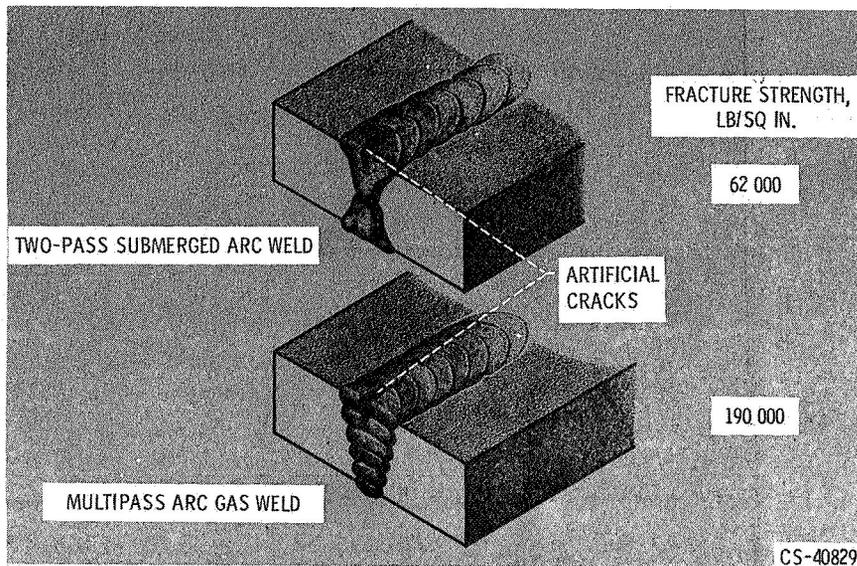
Types of weld used in manufacturing 260-inch-diameter solid propellant rocket casings.
